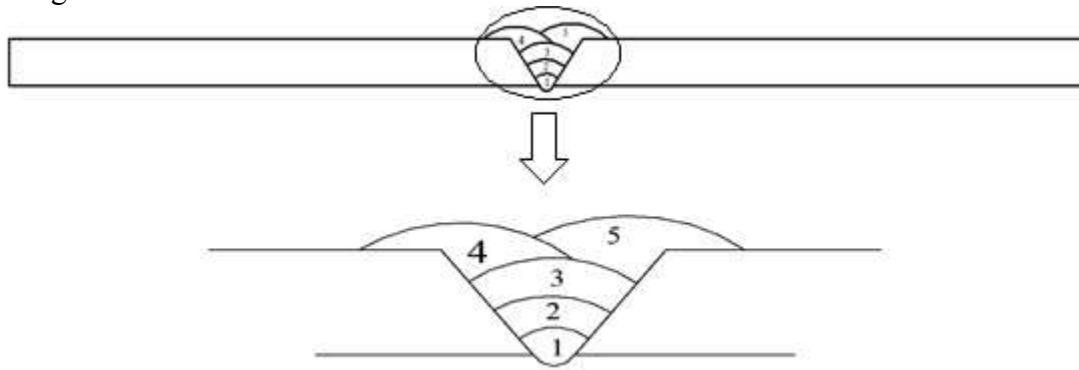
Dimensional details and weld bead sequence for 5 pass butt weld.
